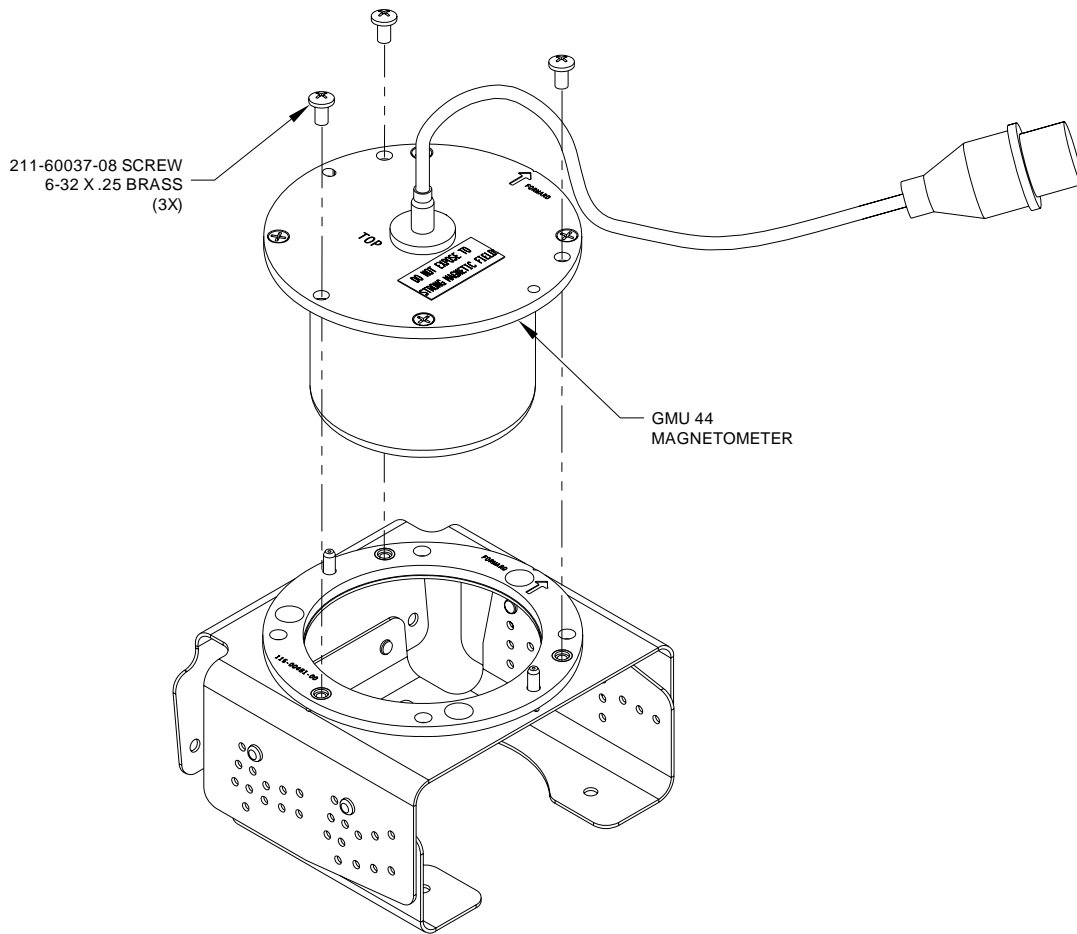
Installation of the GMU 44 into the GMU 44 Universal Mount
